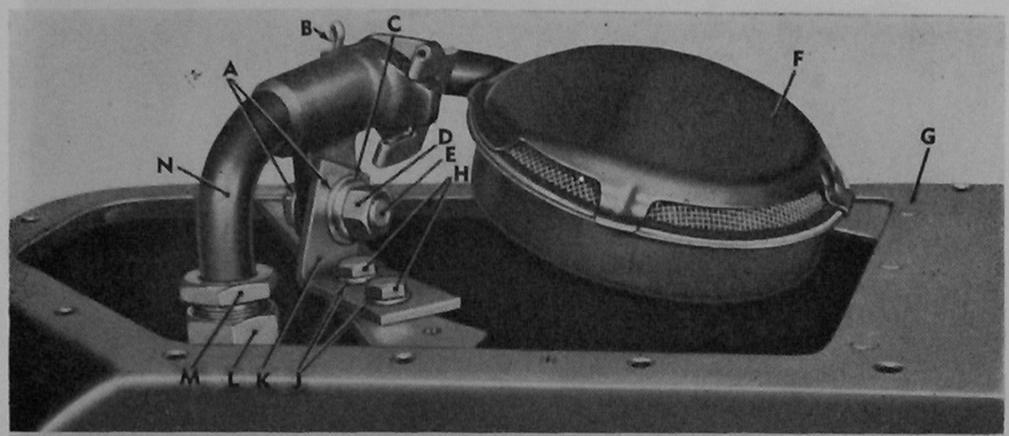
Oil pump inlet strainer installed—engine assembly 7411599.
